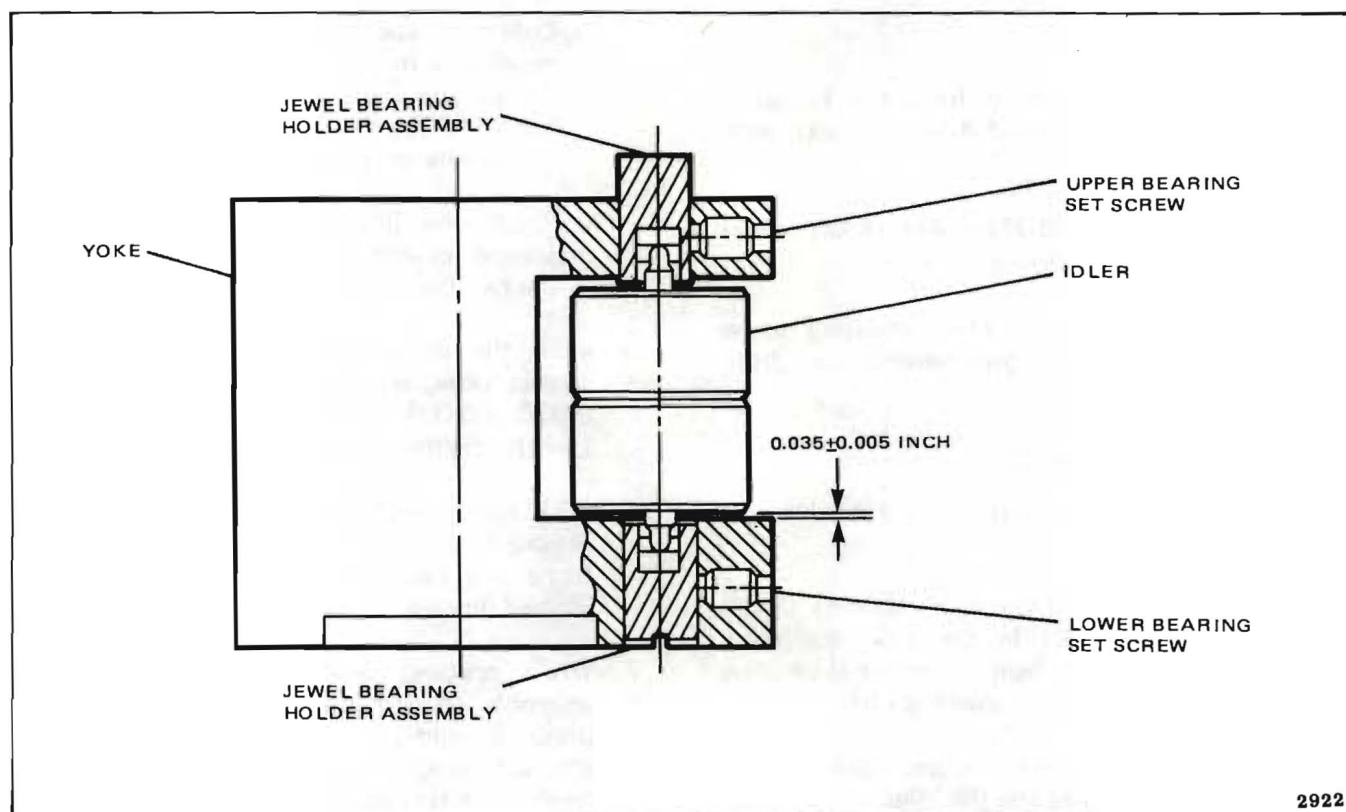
Scrape Flutter Idler, Side Cross-Section View
